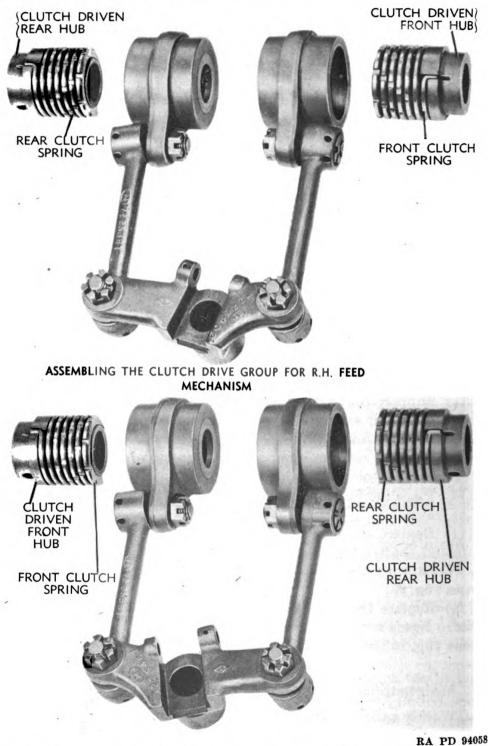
Assembling clutch drive groups for 20-mm right-hand and left-hand feed mechanisms AN-M2.
